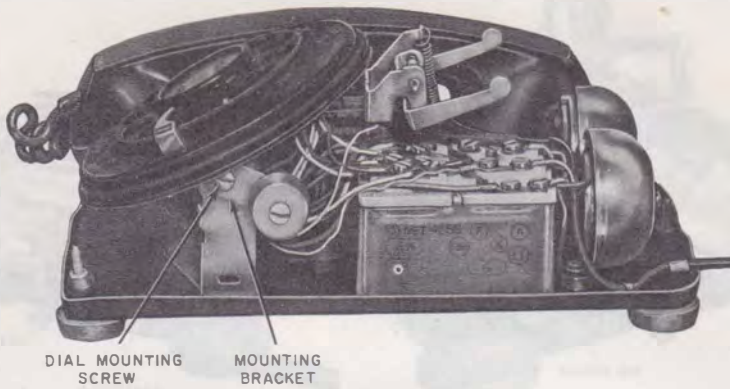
KS-20419L1 Buzzer Mounted in 500-Type Telephone Set
